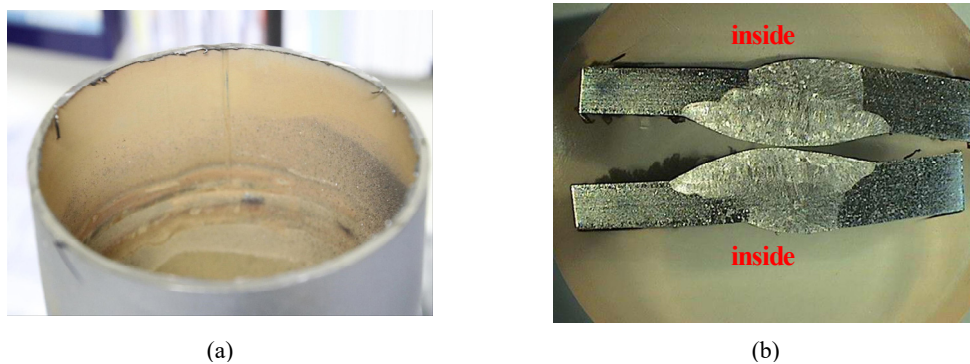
OM images showing inner surface of weldment in No 3 of Fig. 2 (a) and after descaling (b).
